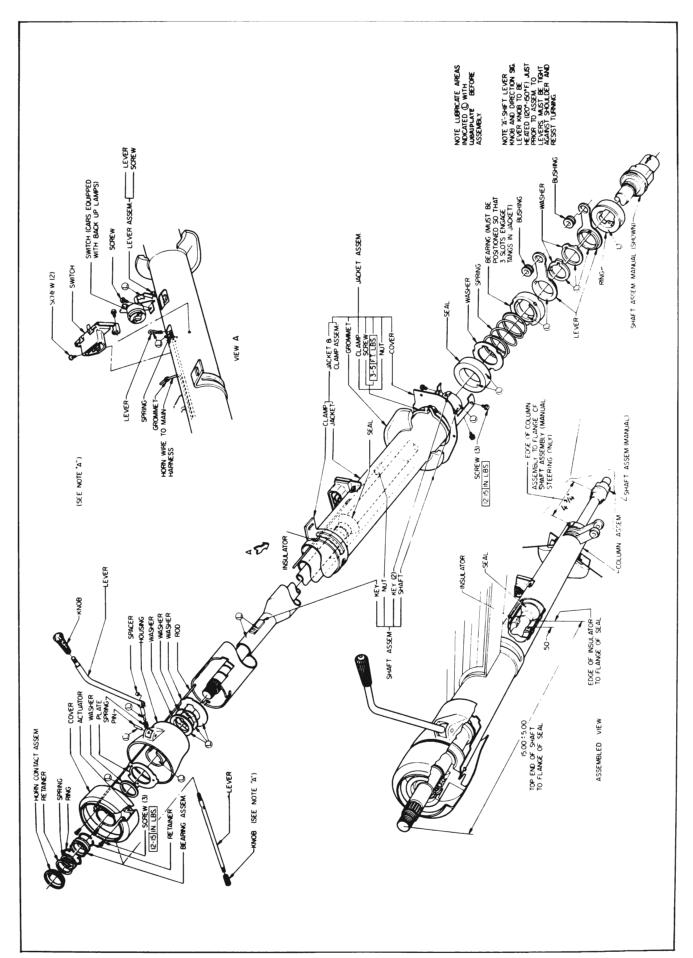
Mast Jacket and Transmission Shaft Assembly - Three-Speed Synchromesh Transmission
